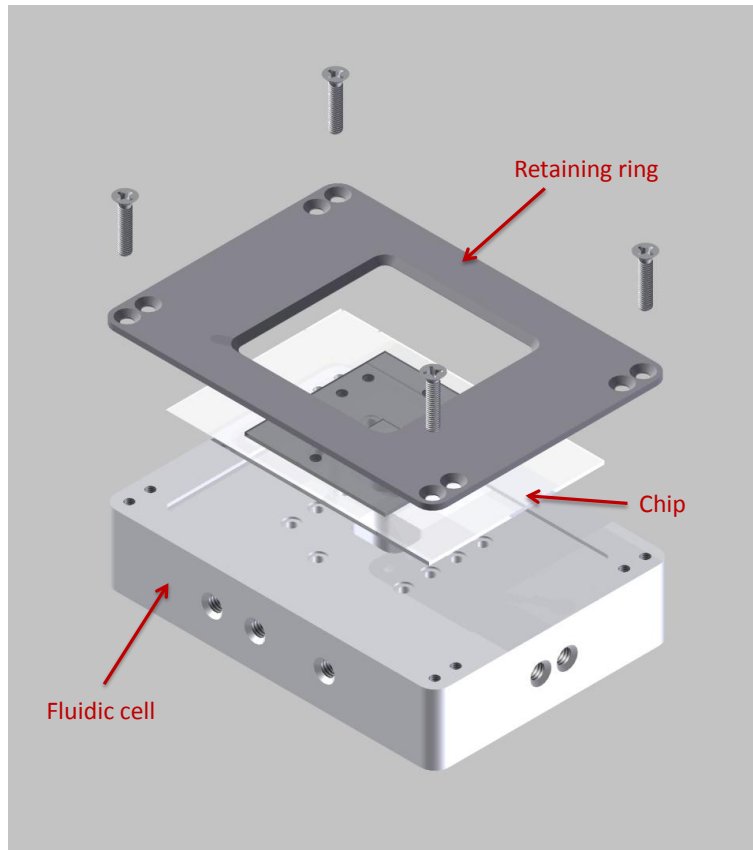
Schematic view of disassembled experimental setup, cell, chip and retaining ring.
